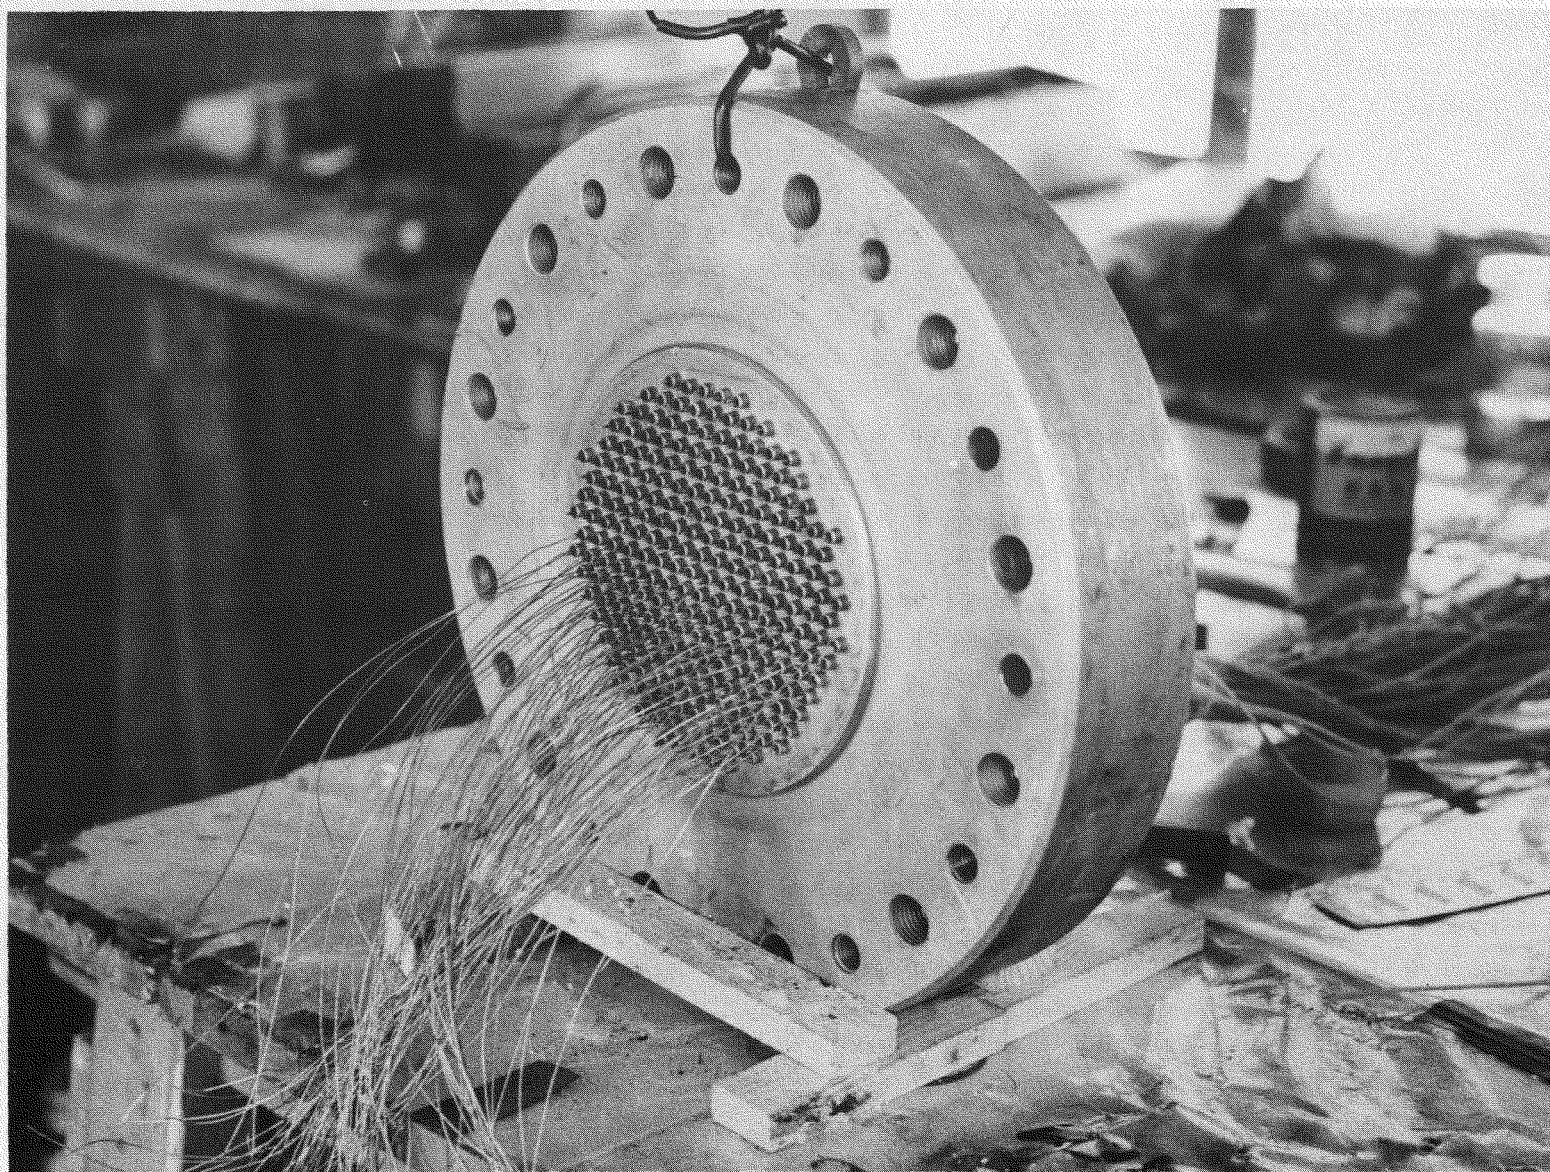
B. FERRANTI THERMOCOUPLE PENETRATION PLATE 240 METAL-CERAMIC SEALS
